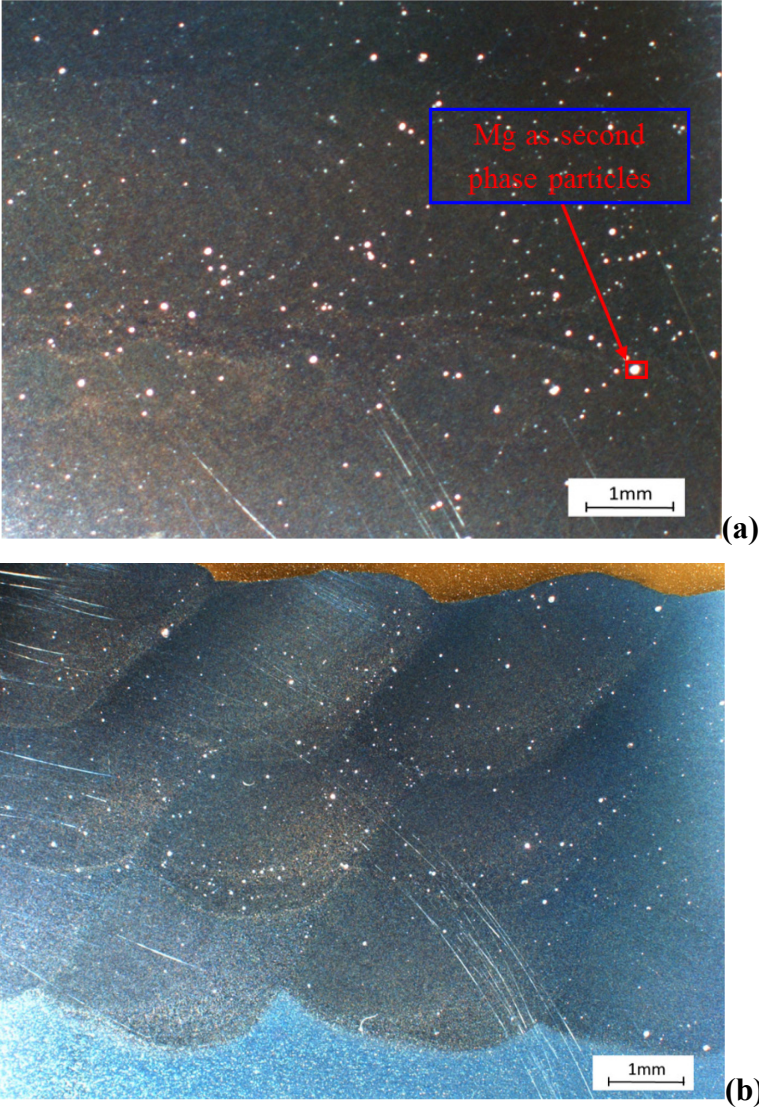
Optical Macrograph of As-MIG-welded workpiece (sample 2)
